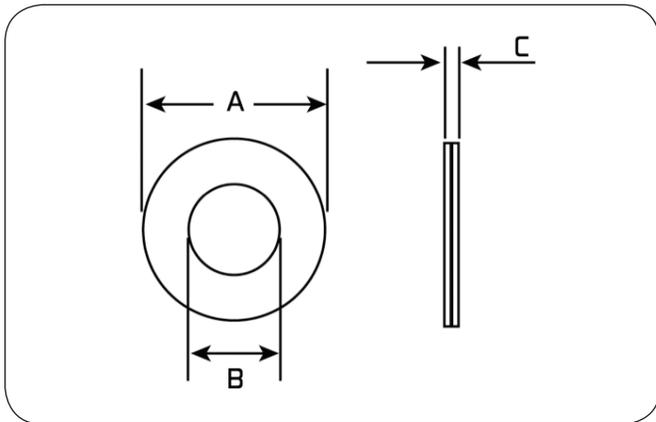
PPTC key measurements inside a cap assembly include (A) outside diameter, (B) inside diameter, and (C) thickness.
